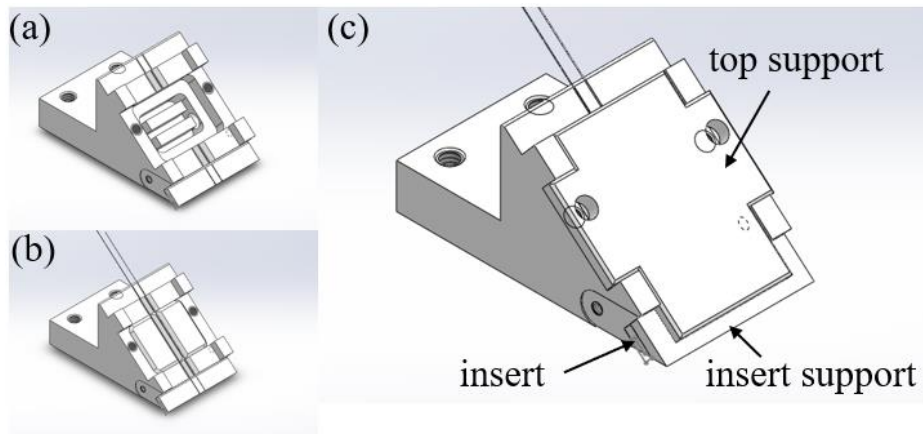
Polishing holder assembly. (a) polishing holder main part, it has two through holes to connect with Buehler polisher, and a cavity for vacuum system. (b) polishing holder support and insert (graphite) connected with main part. (c) top support and insert support connect with holder and securely hold the fiber.
